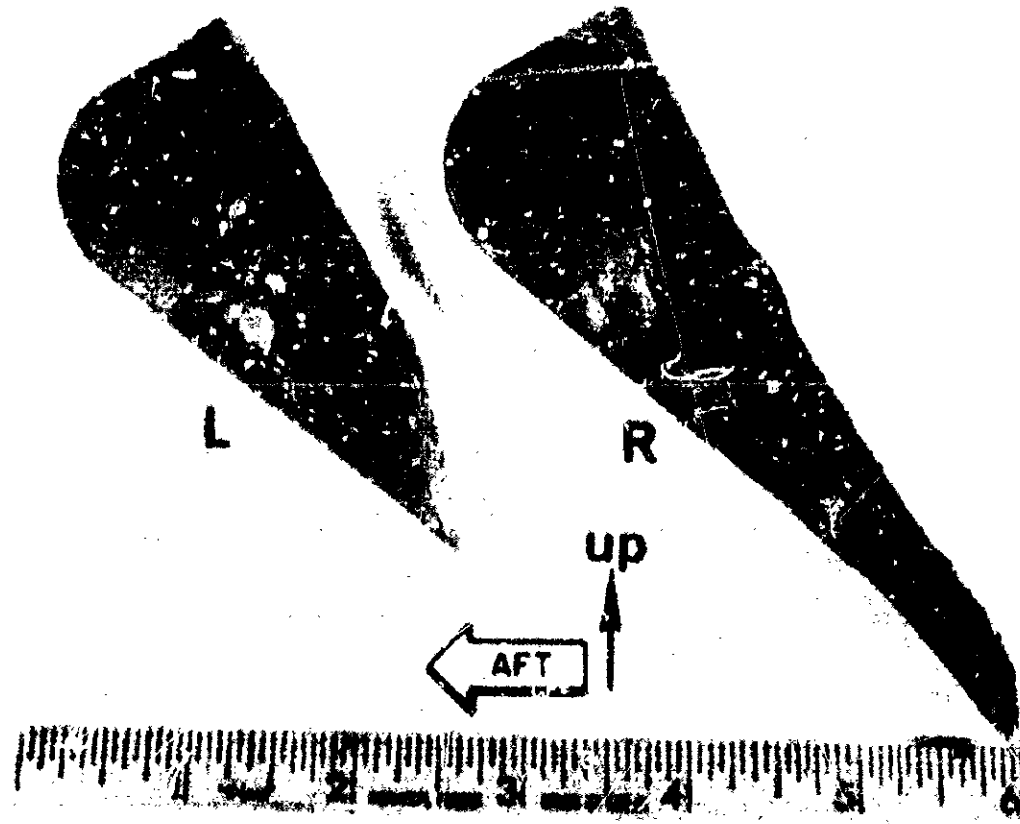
A.—Left and right ears of forward attachment fitting which remained attached to horizontal stabilizer.
